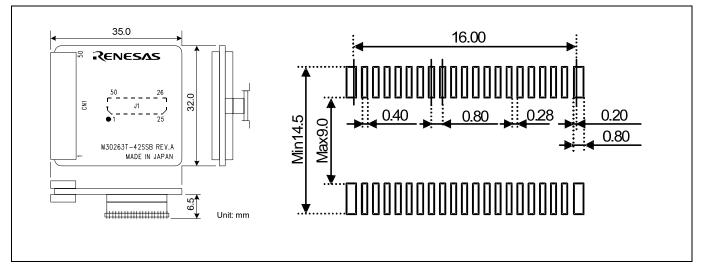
External dimensions and a sample foot pattern of the converter board M30263T-42SSB
